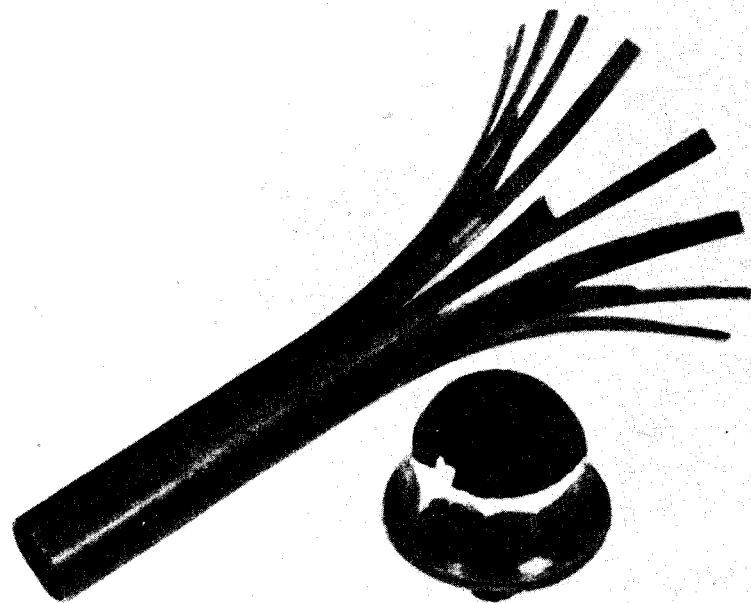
(left). Typical stress-corrosion cracking in a brass tube and a brass lamp fitting.
